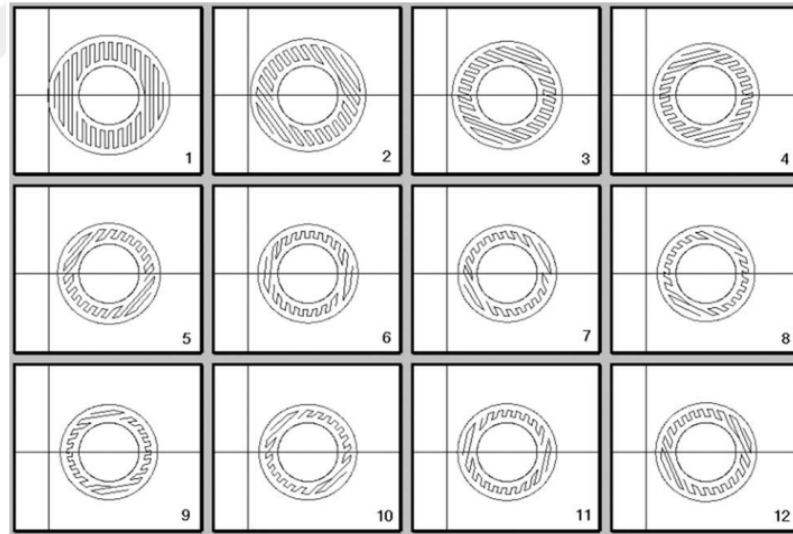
9. Sketches illustrate the rotated weld path for different layers [97]
